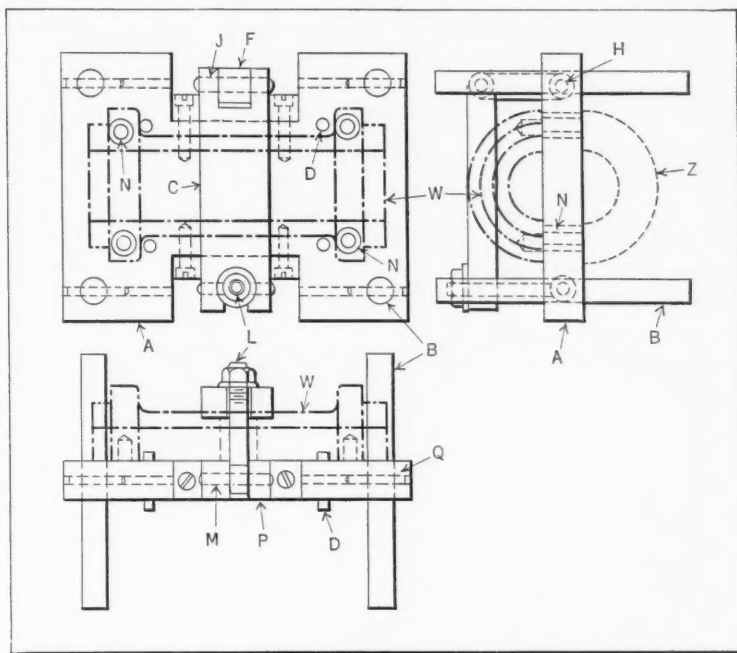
Reversible Plate Type Jig Used in Drilling Dowel-holes in Matched Halves of Split Bearing
